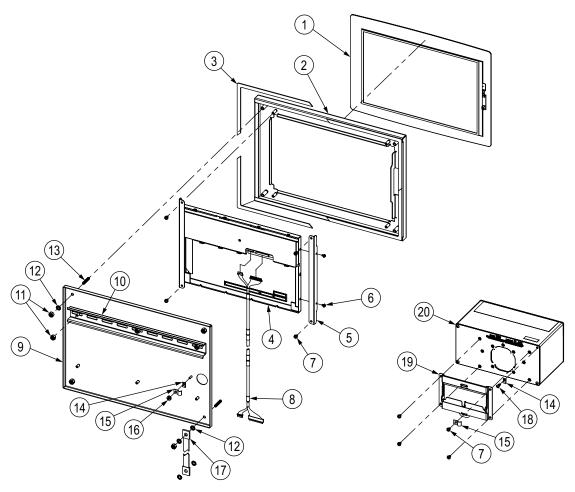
12 Inch Touch-Only Panel Mount Repair Parts
